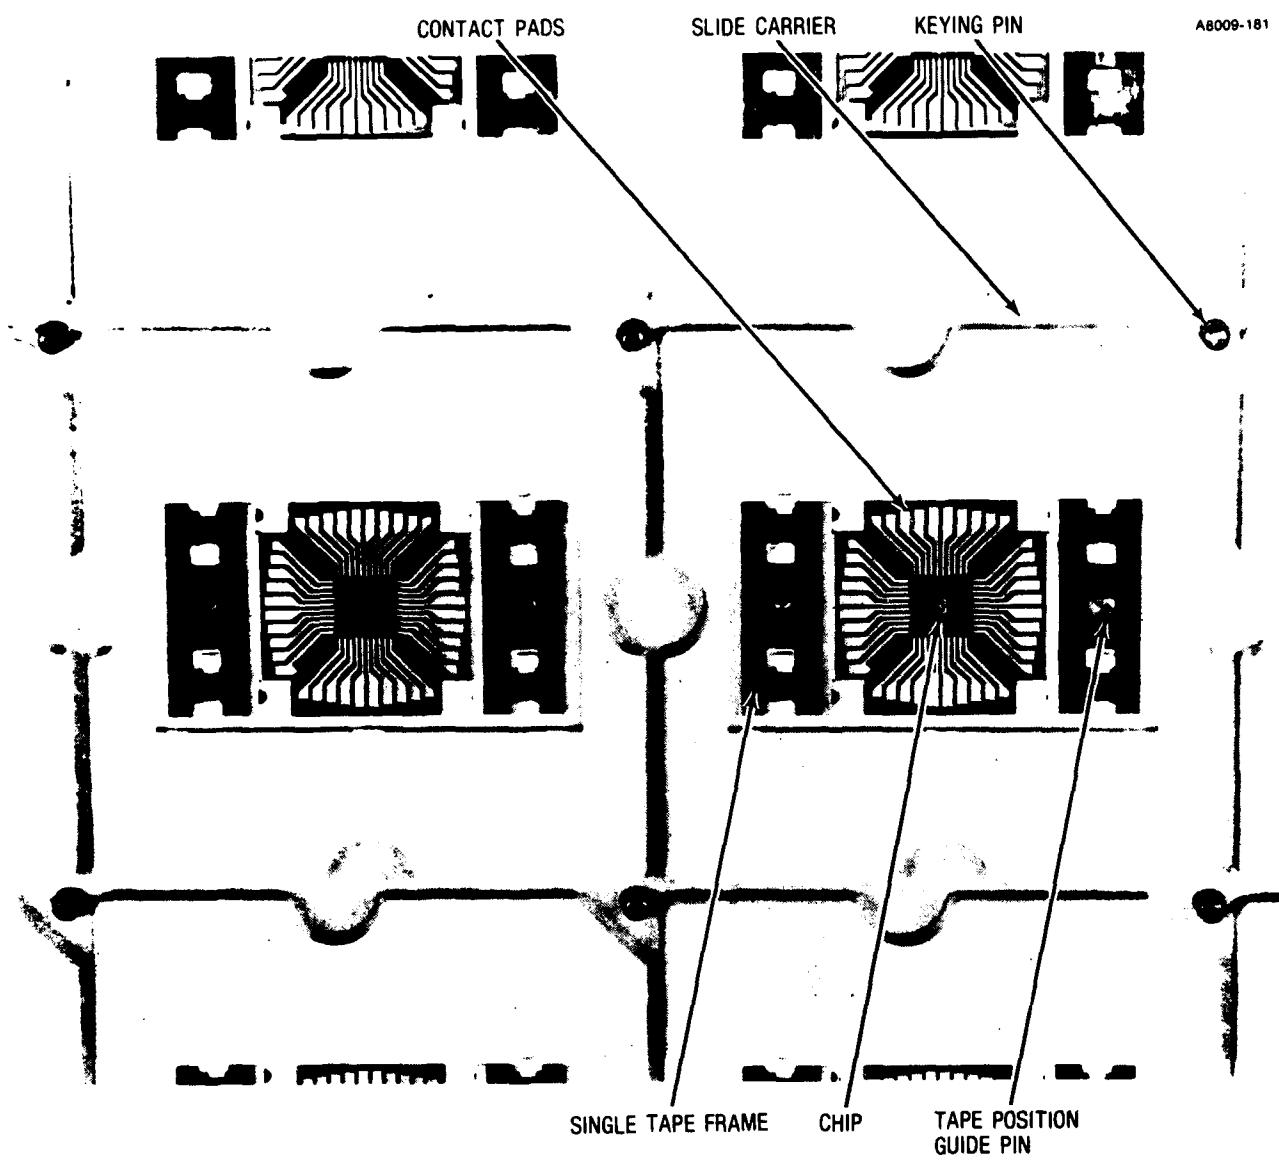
Chip on Single Frame Mounted in Slide Carrier
